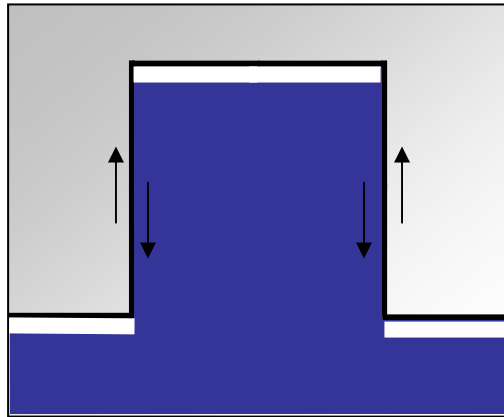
Looking at sidewall ‘drag’ after initial adhesion breaks down.
